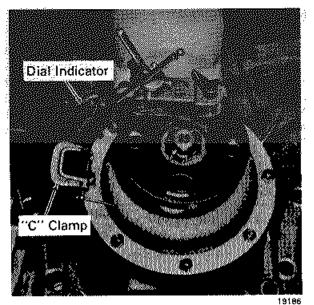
1 Checking Auxiliary Drive Gear Backlash
